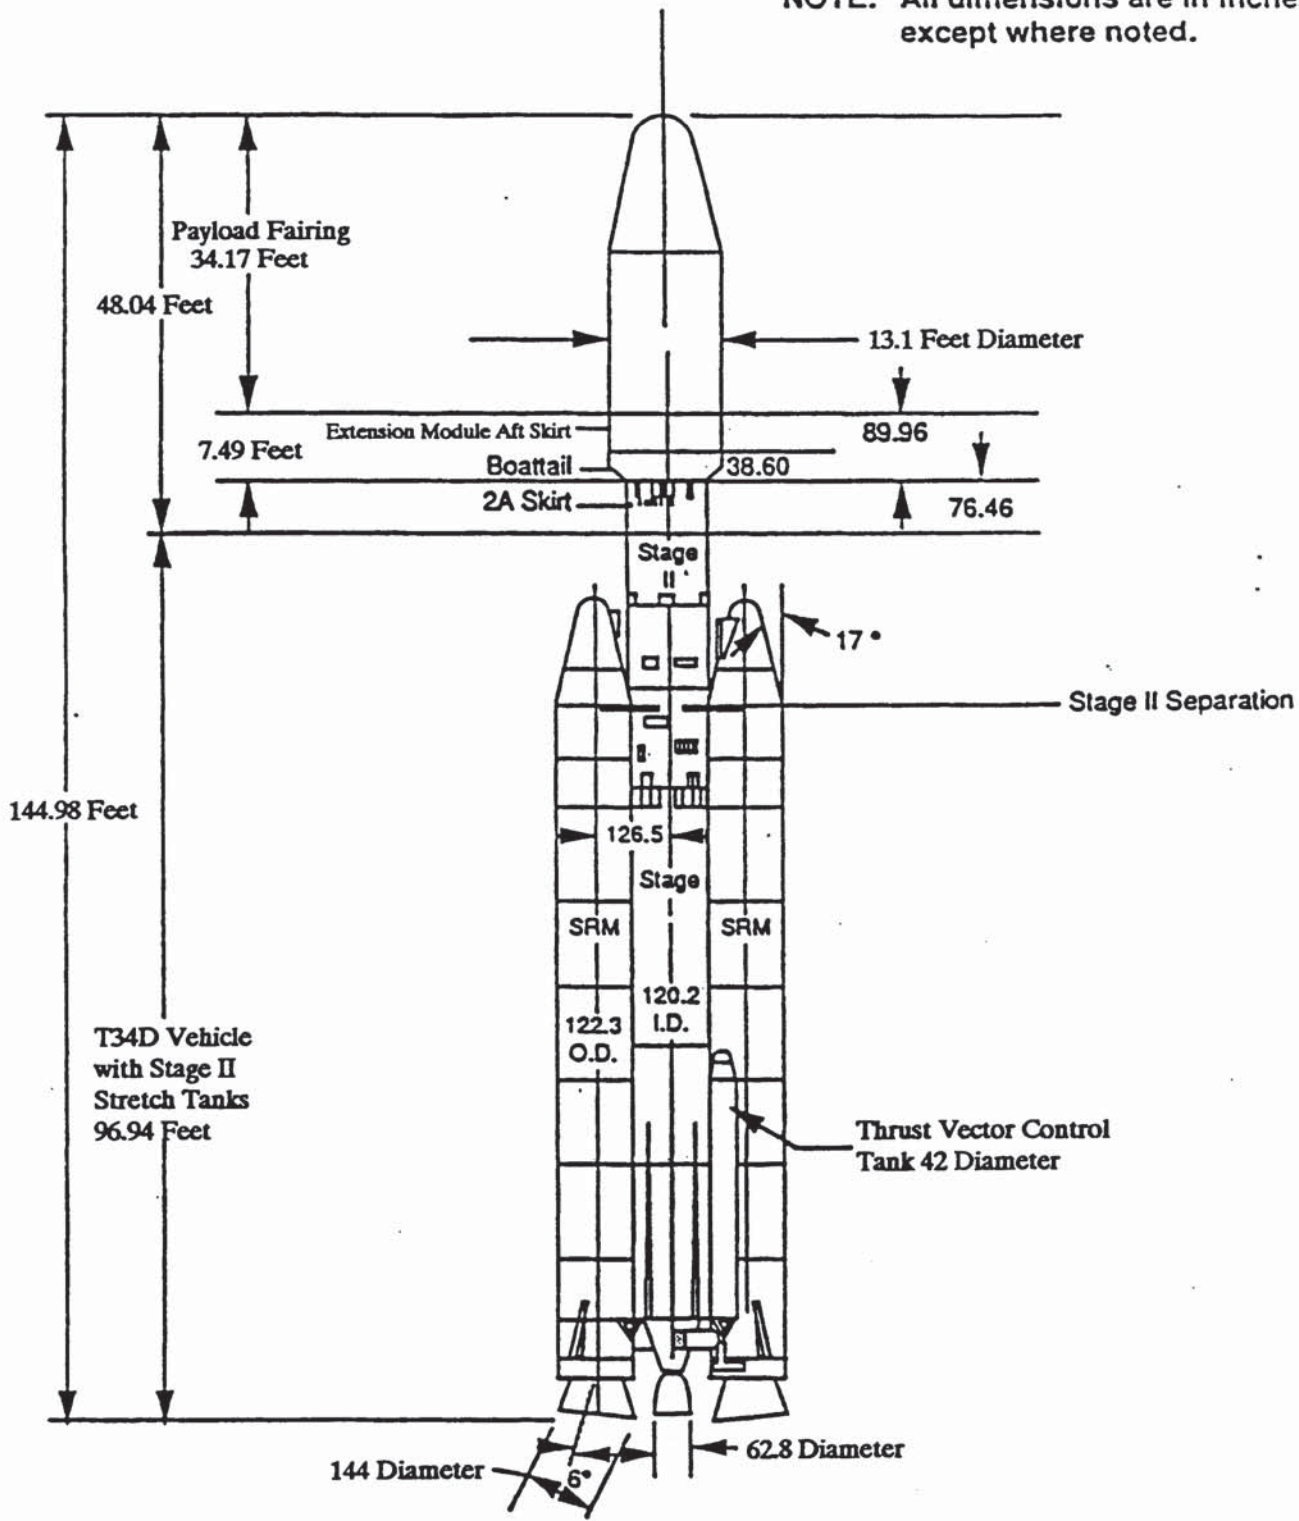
Commerical Titan Outboard Profile Single Payload Configuration
